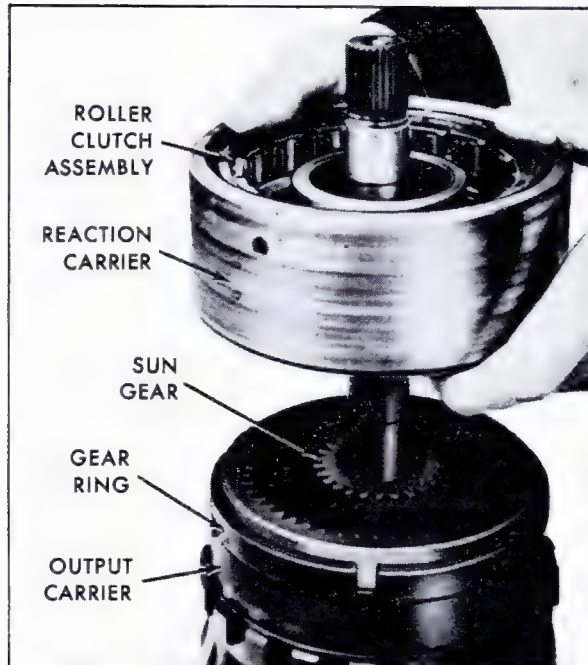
Removing Reaction Carrier and Roller Clutch Assembly
